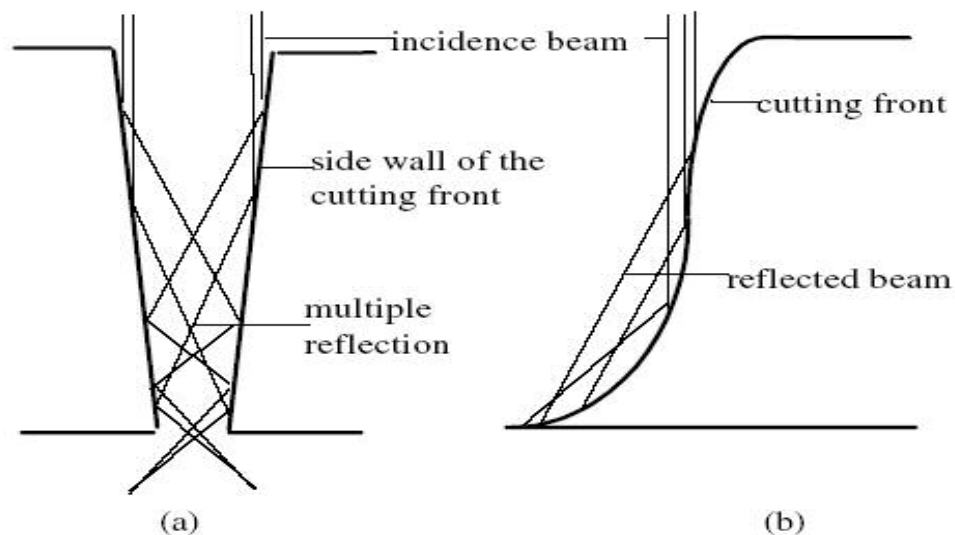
Multiple reflections of laser beam in both the cutting front and the side walls of the cutting front: (a) front view and (b) side view [24]
